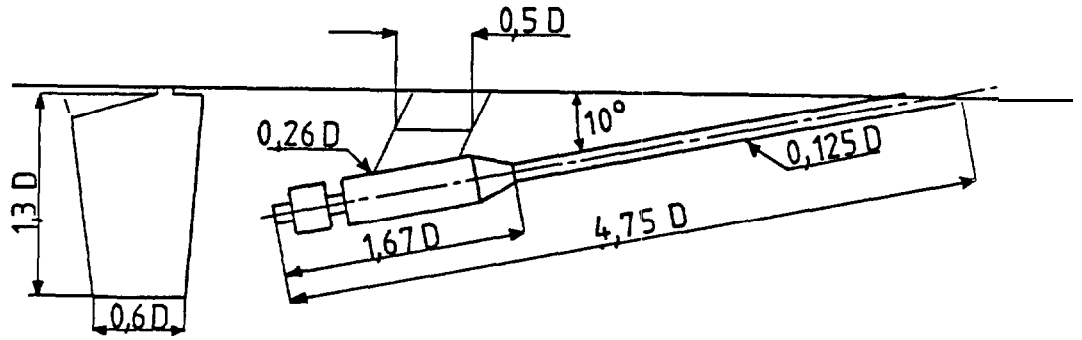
Dimensions of shaft bracket and rudder used in the example.
